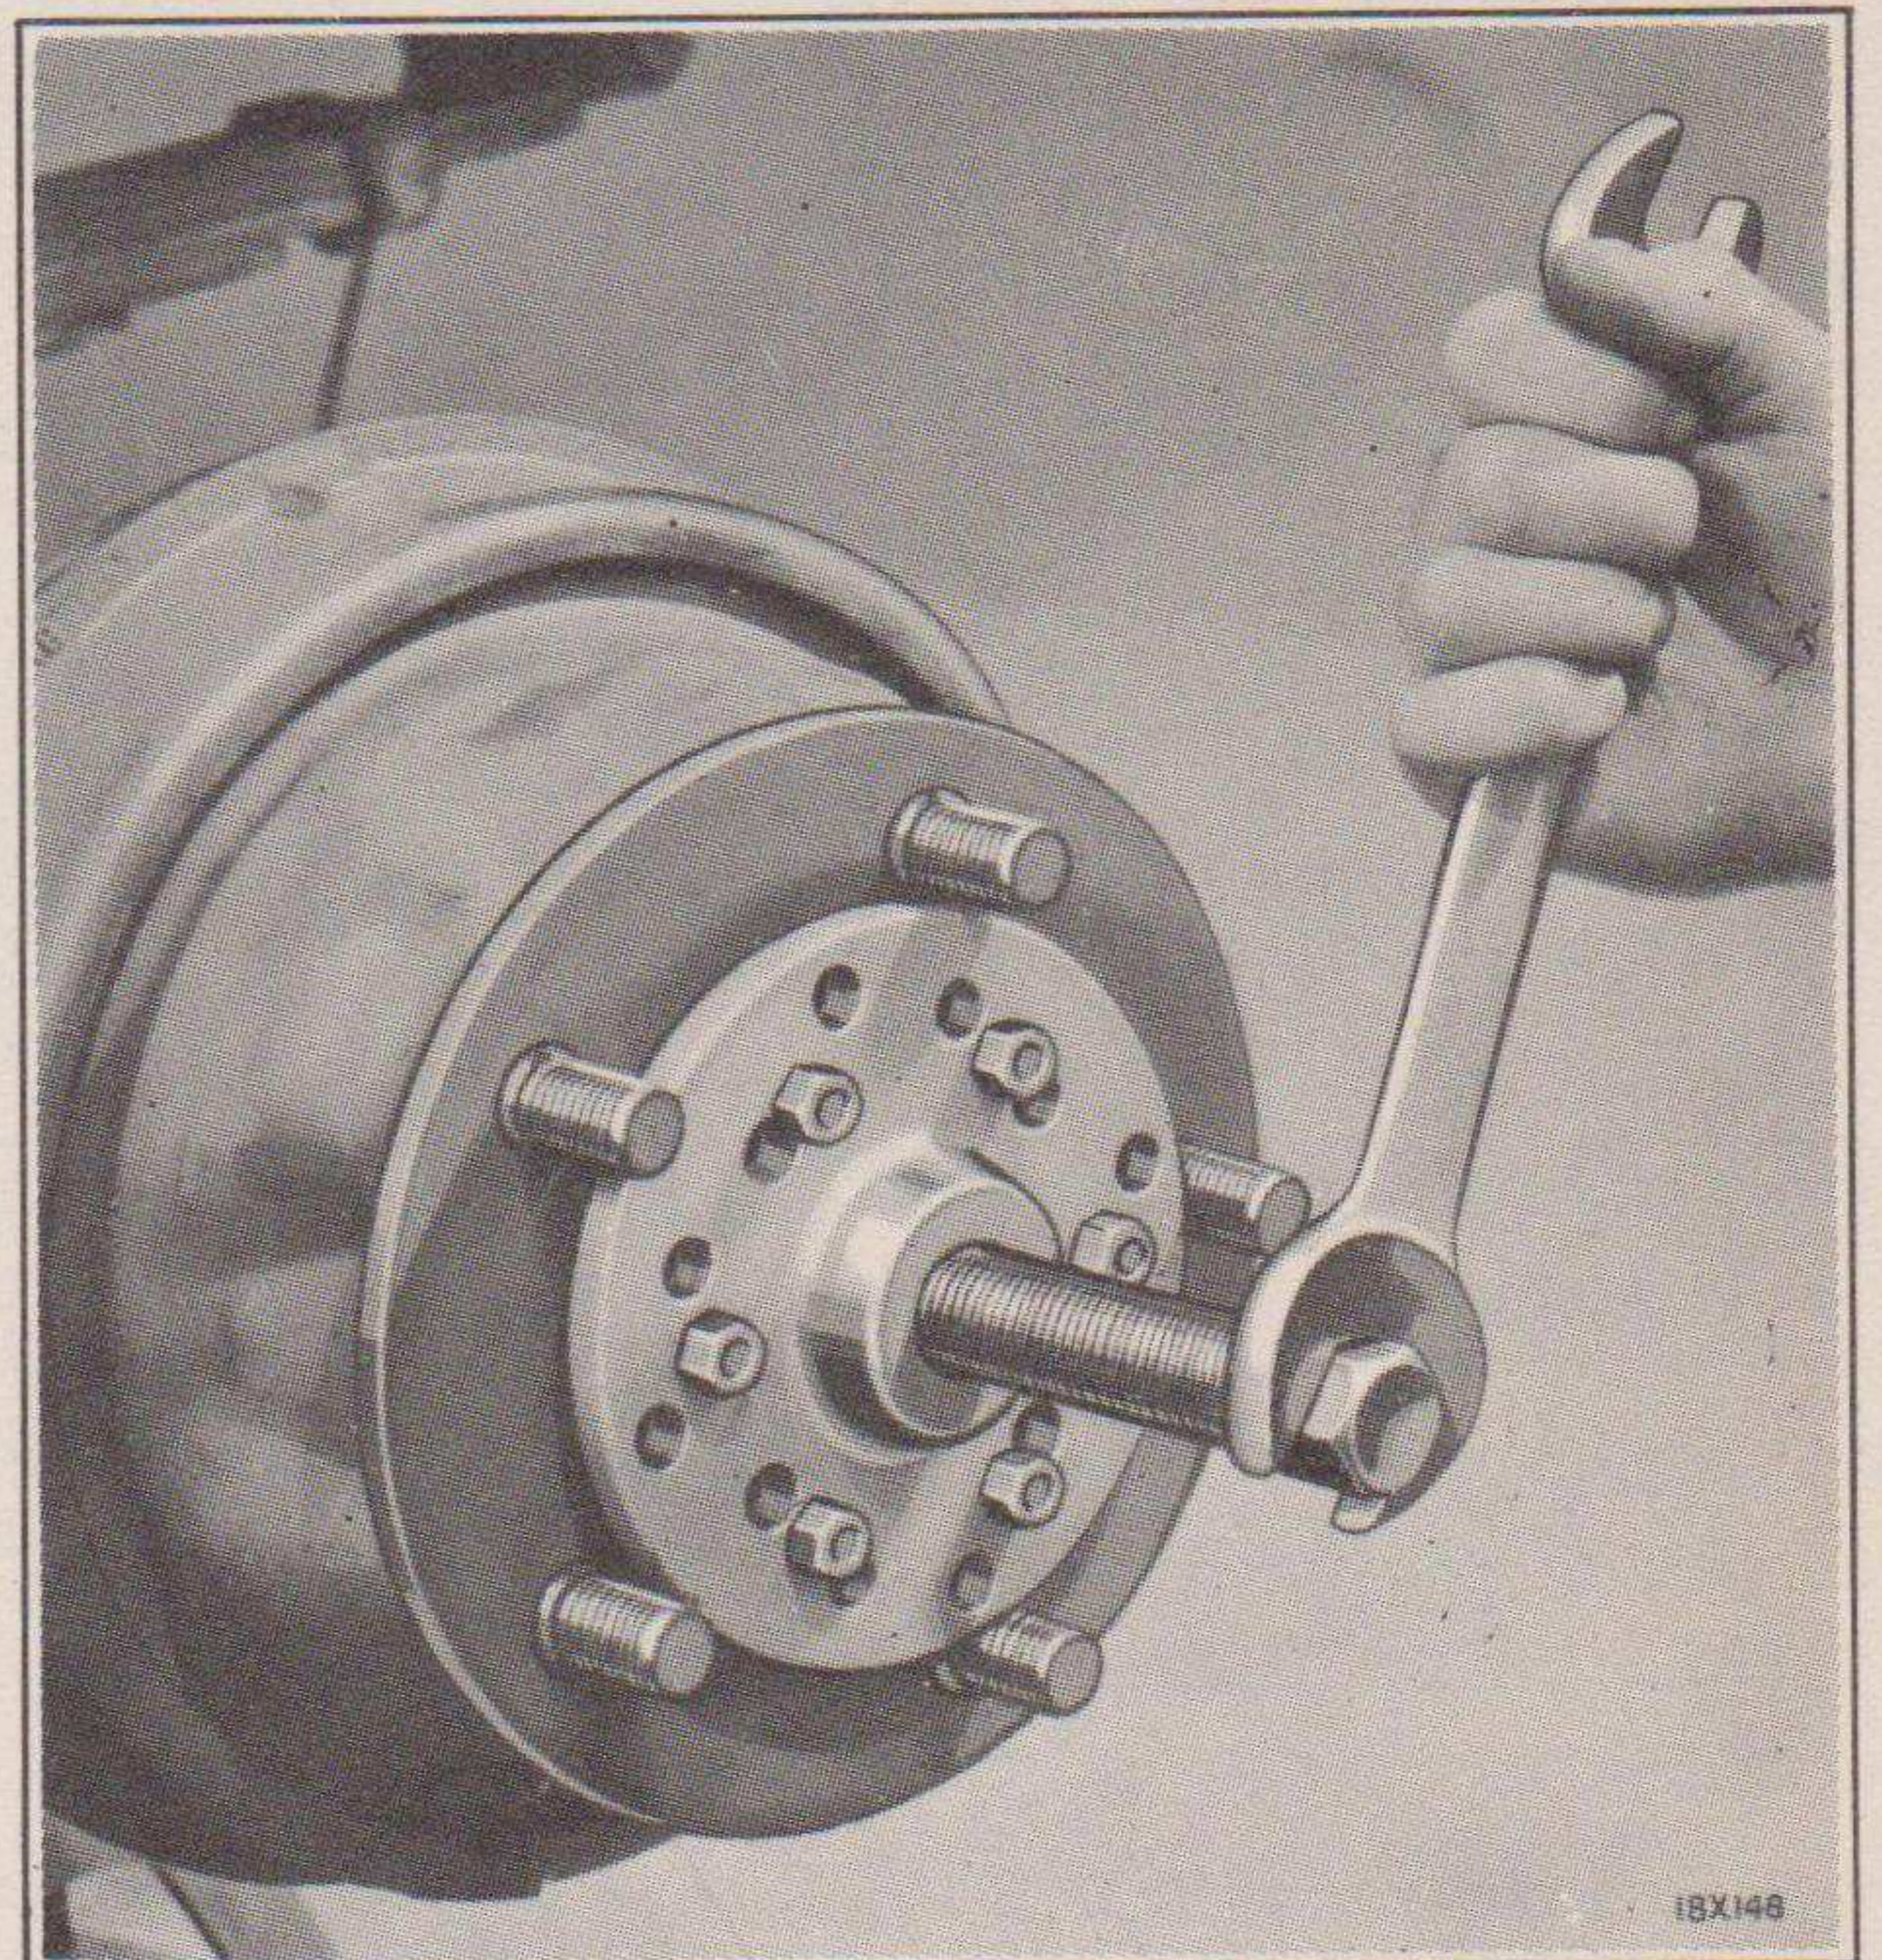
Removing Wheel Hub with Puller (Tool DD-423)
